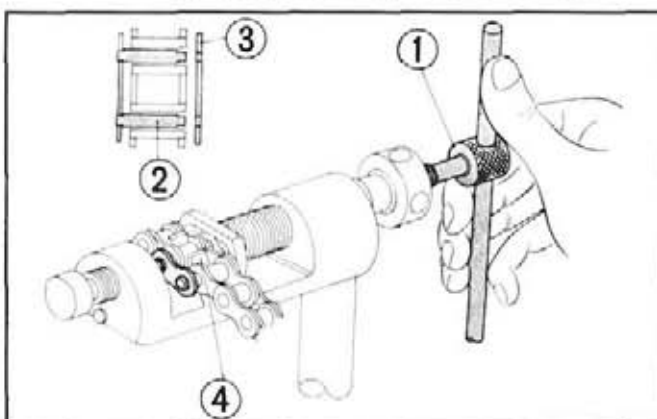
① Pressure bolt B ③ Joint plate
